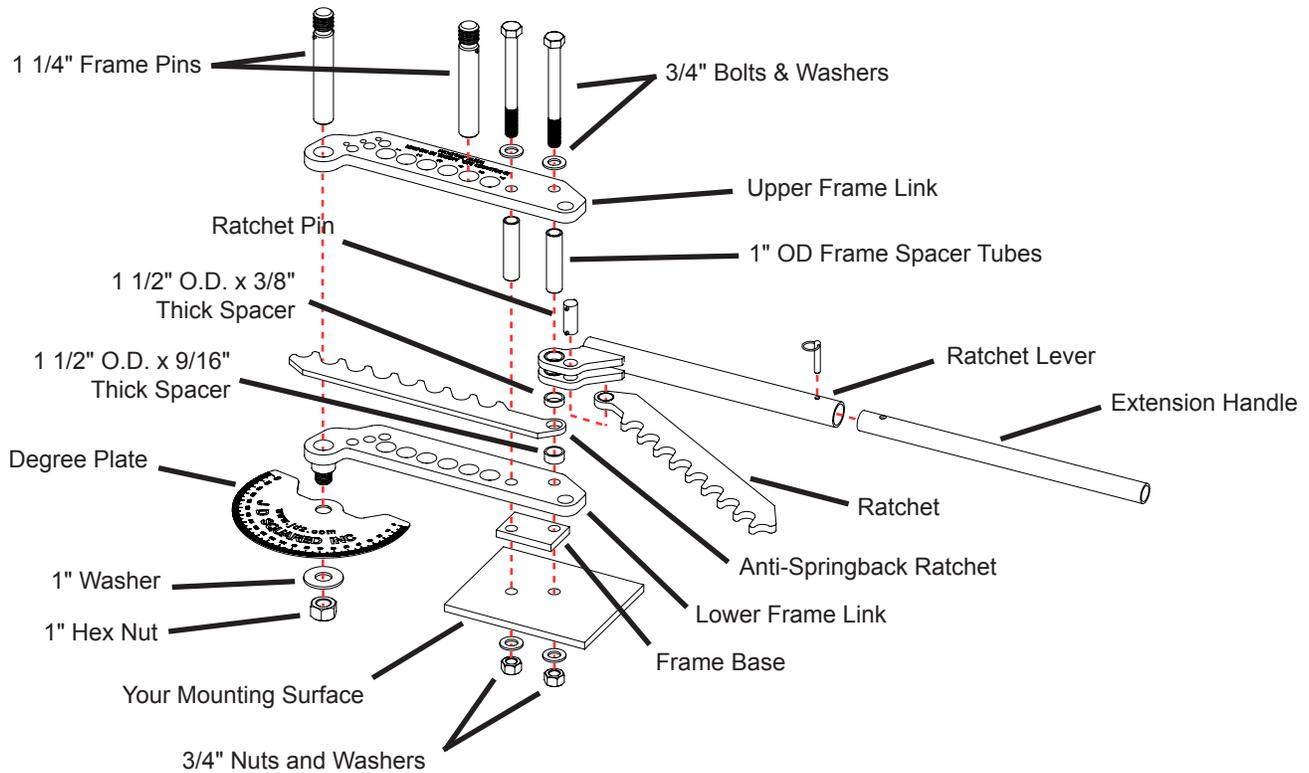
Exploded view of the Frame Assembly with Degree Plate
